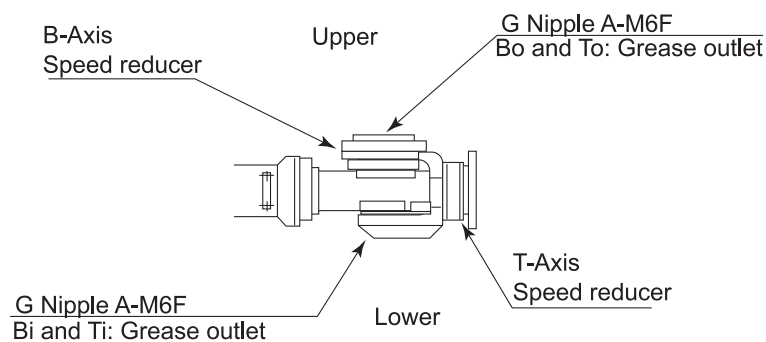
B-Axis and T-Axis Speed Reducer Diagram
